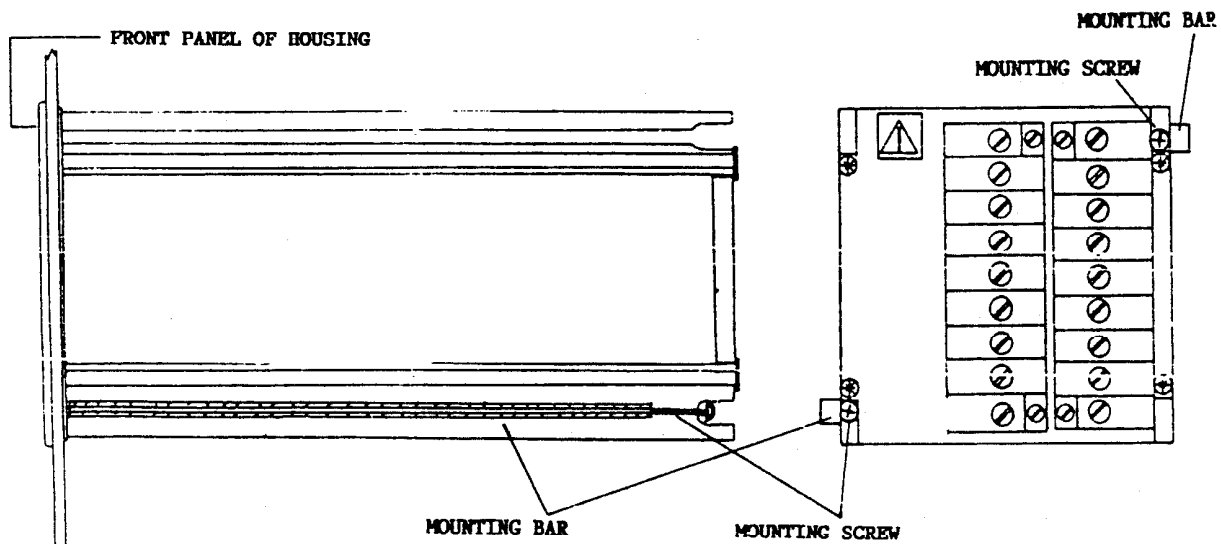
ATTACHMENT OF HOUSING TO MOUNTING PANEL
